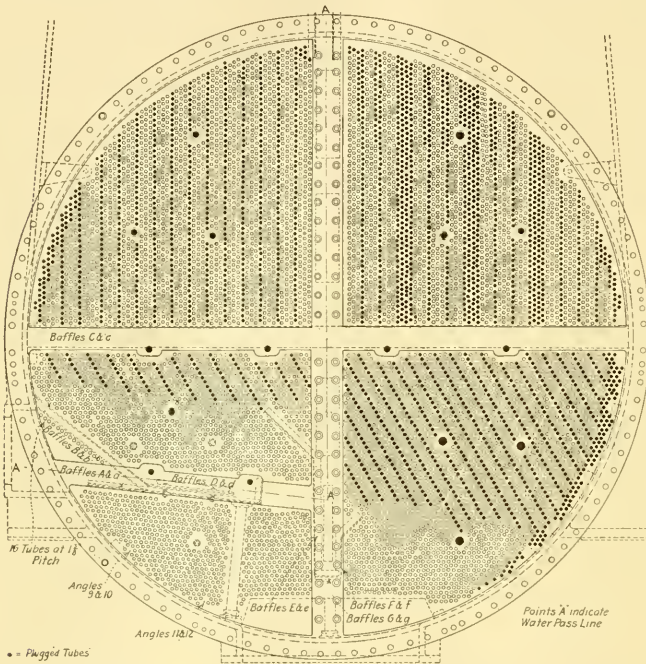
DETAILS OF TUBE ARRANGEMENT IN THE CONDENSERS
